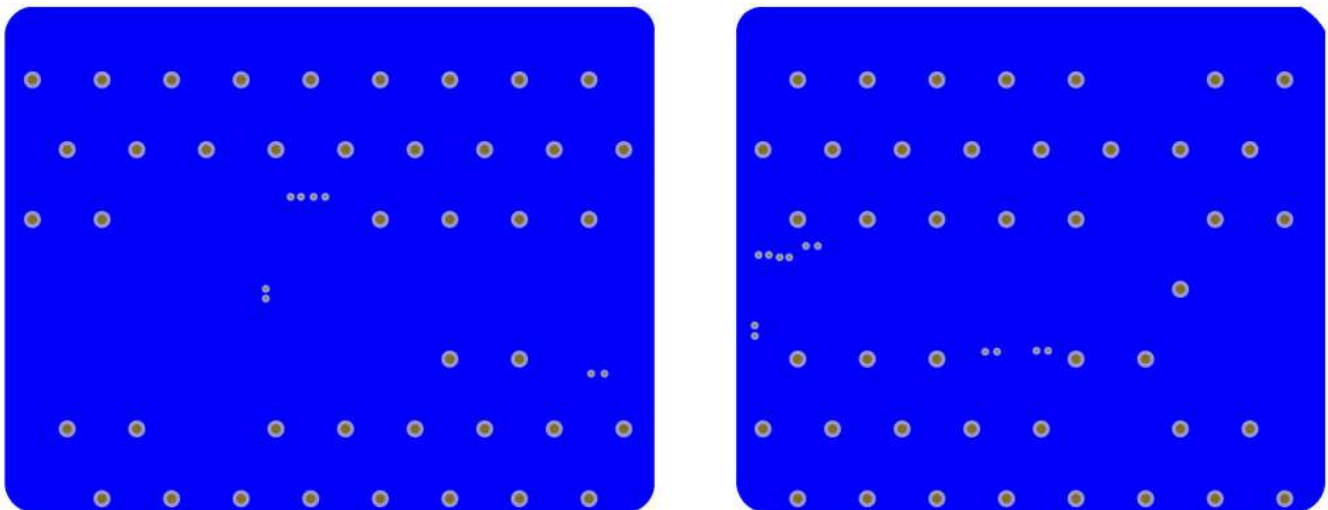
ISOM8710DFFEVM PCB Layout - Bottom
